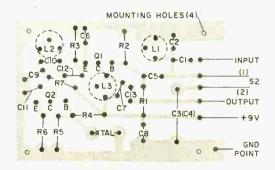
Parts installation on the upper side of the board. Note that all coils have three support lugs.
